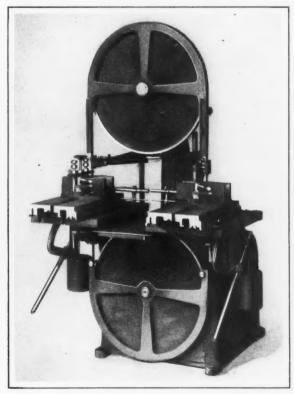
Laidlaw Band Saw which Cuts on Both Sides of Machine
